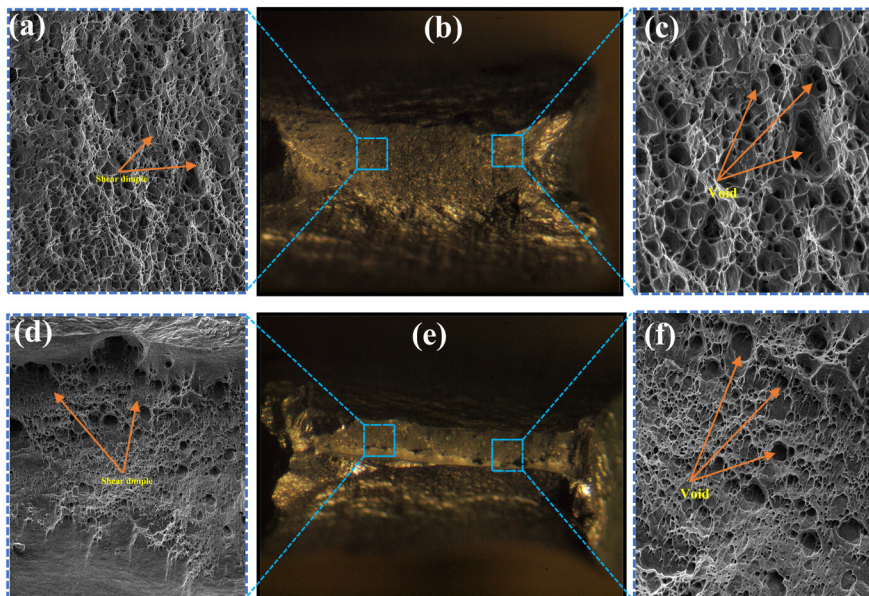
OM & FESEM images showing the fracture surface of the tensile-tested specimens: (a,b,c) base alloy; (d,e,f) highest tensile properties sample (1600 rpm and 100 mm/min⁻¹ with threaded probe shape).
